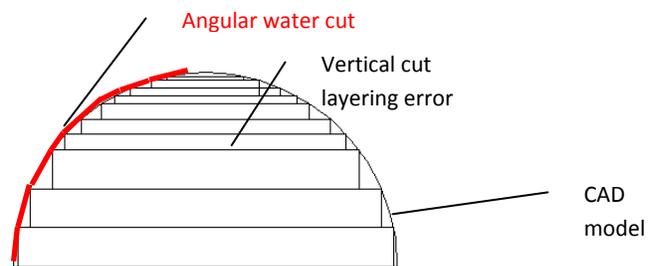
CAD model, layered part, layering error, and near perfect angular abrasive waterjet cutter.
